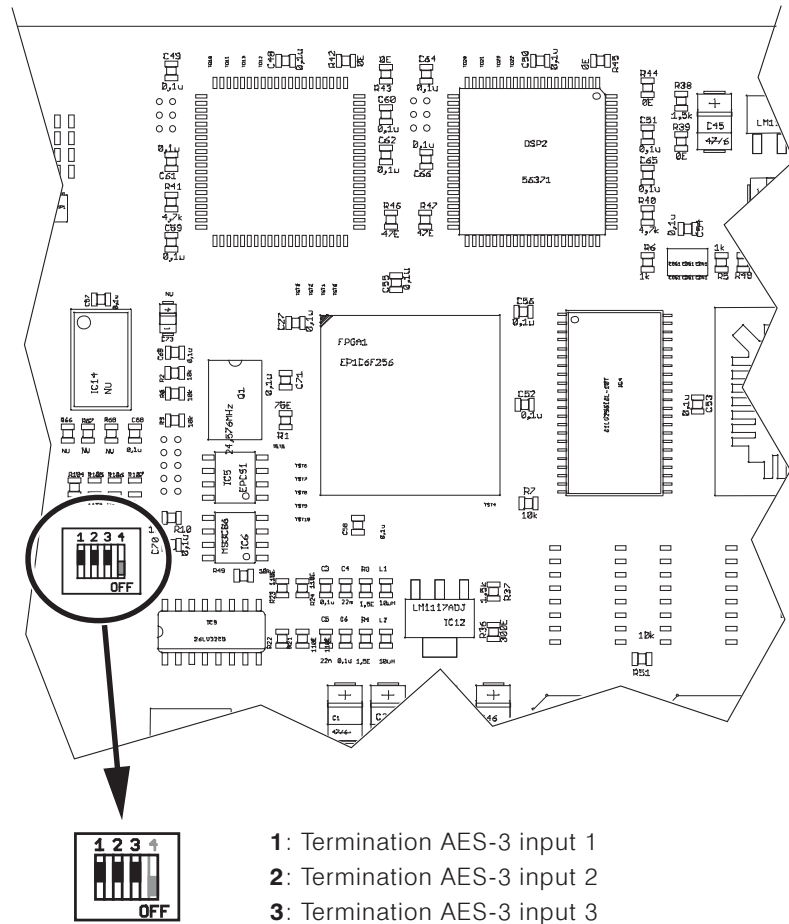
Partial view of the main pcb with the DIP switch
